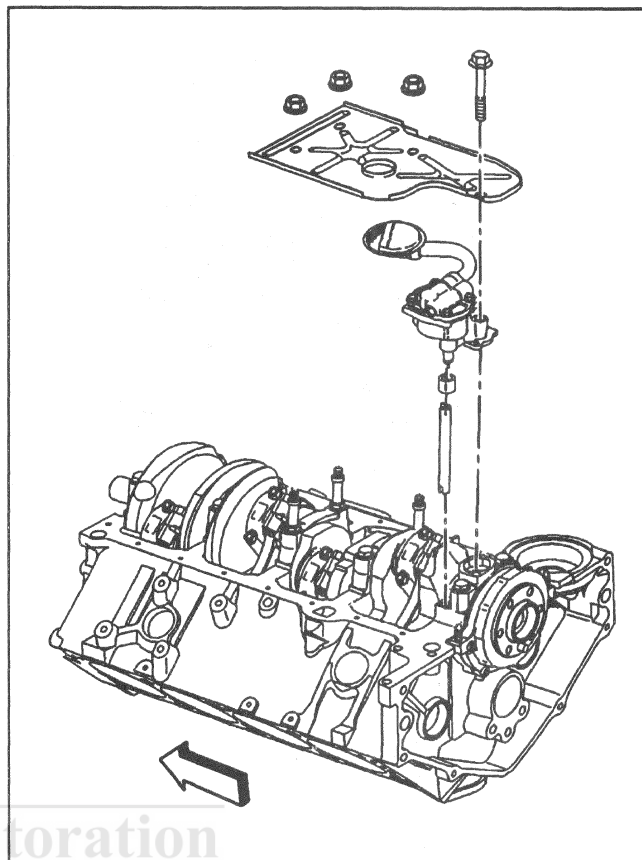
Oil Pump, Crankshaft Oil Deflector, Driveshaft, and Retainer
